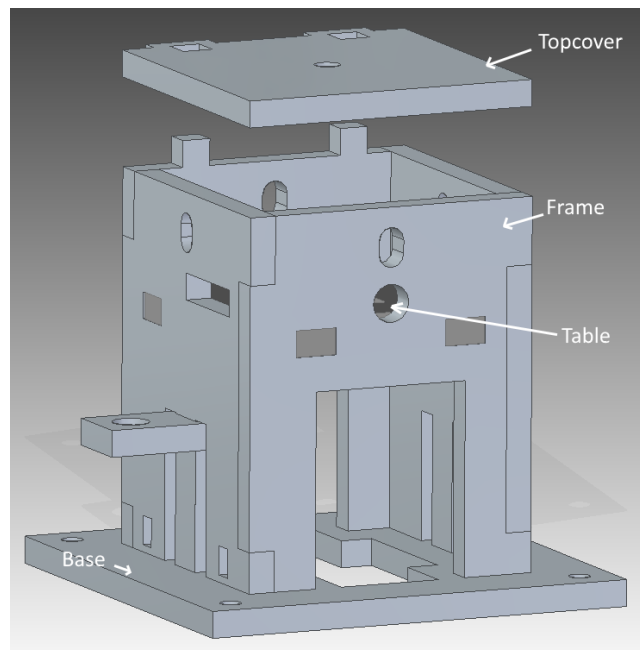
The assembled design of the laser-cut base without motors. Above the top cover floats. There are holes for LED lighting visible and bigger holes for the micrometer adjusters. The table on which the sample holder will rest is slightly darkened. Attachment bars for the focus system and holder for the focus' micrometer adjuster are visible at the bottom half. And finally the bottom board is visible with holes for attaching it to anything when desired.
